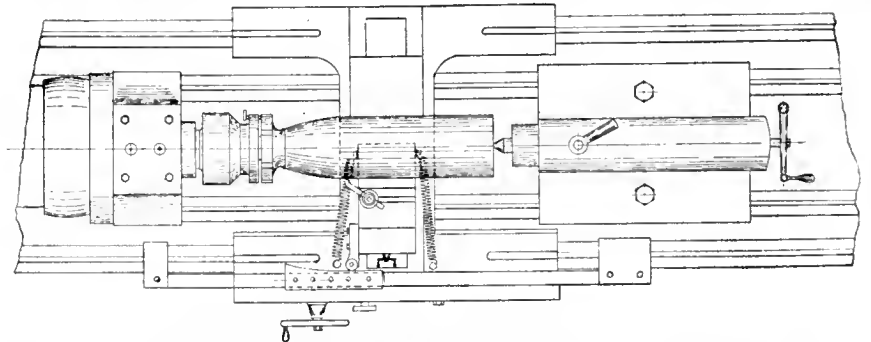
PROFILE ATTACHMENT FOR TURNING OUTSIDE OF 4.5 INCH H. E. SHELL ON ENGINE LATHE.
